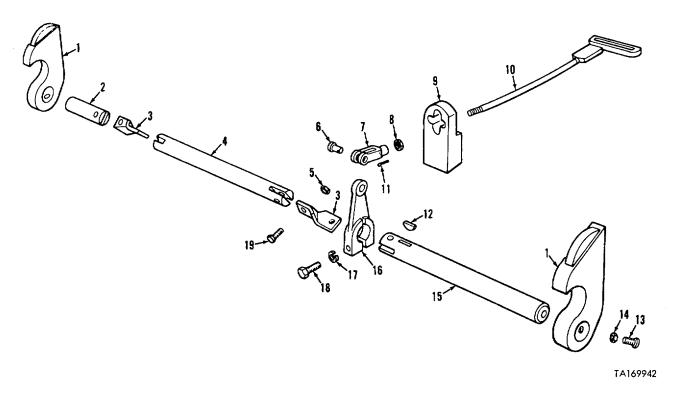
Moldboard carrying hooks, control handle, and related parts (early model bulldozer).
